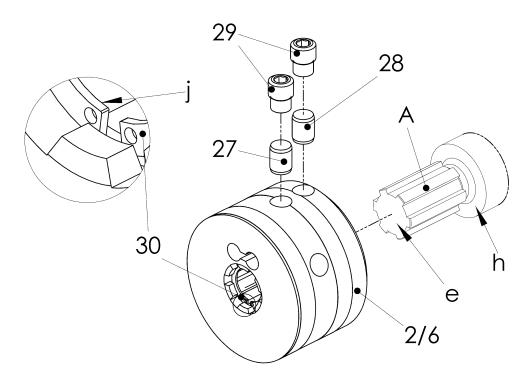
Mounting the CENTALOC-clamping hub (2/6)
